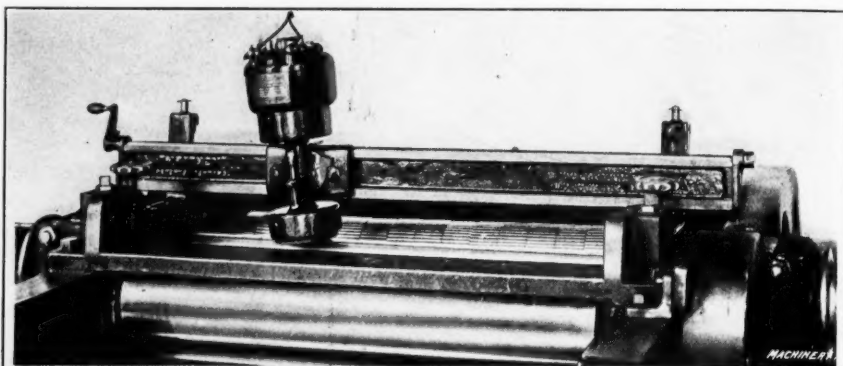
Use of Stockbridge Grinder in sharpening Planer Knives
